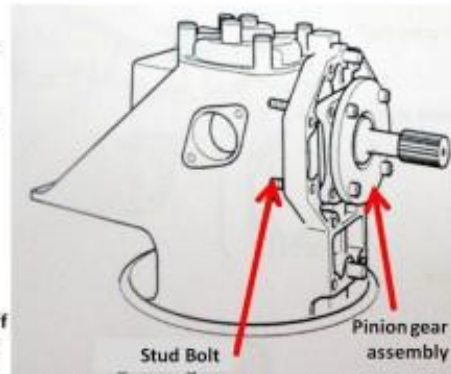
shows the bell housing removed and exposes the pinion shaft assembly.
